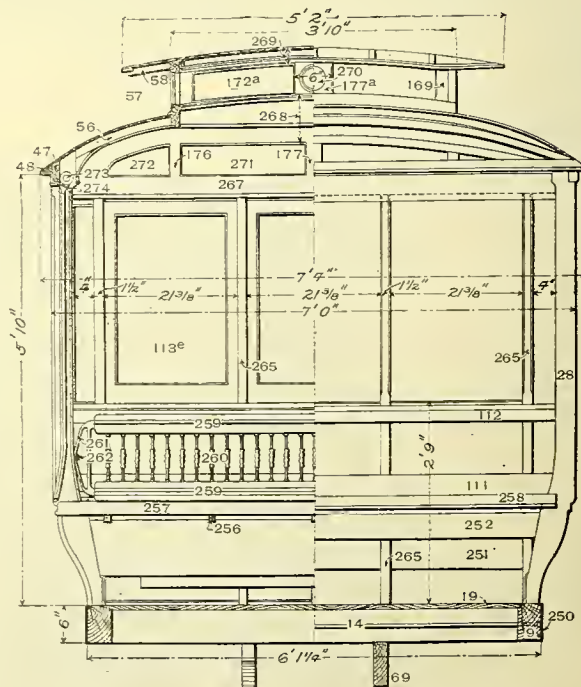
Half Cross Section and Sectional End Elevation of Framing.
